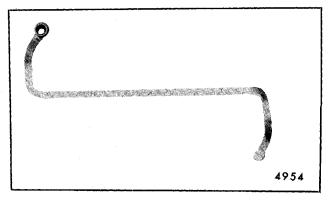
Front Door Hinge Tool J-28500 (metric) or J-24353 (inch) - All Styles with Bolt-on Hinges
